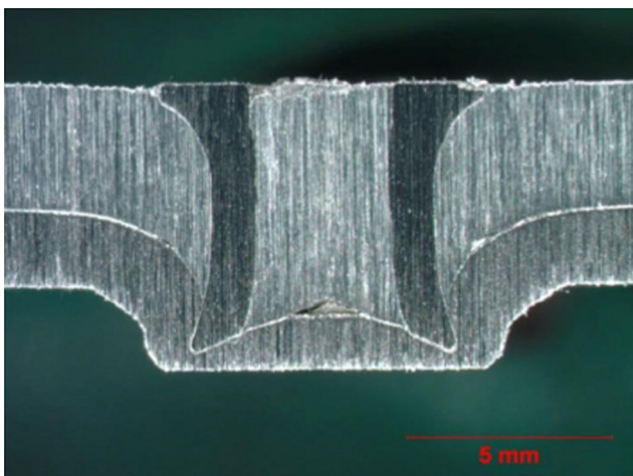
An SPR joint with a thick aluminium top sheet and a thin steel bottom sheet by a fully tubular rivet (courtesy of Henrob Ltd. [24])
